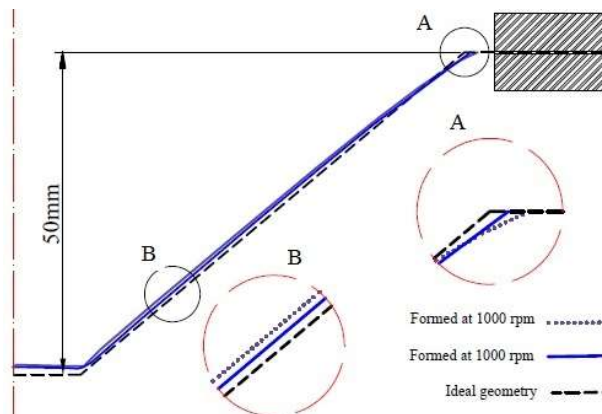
Section view of cad geometry and inner surface of formed parts at 1000 RPM and 7000 RPM tool rotation speeds
